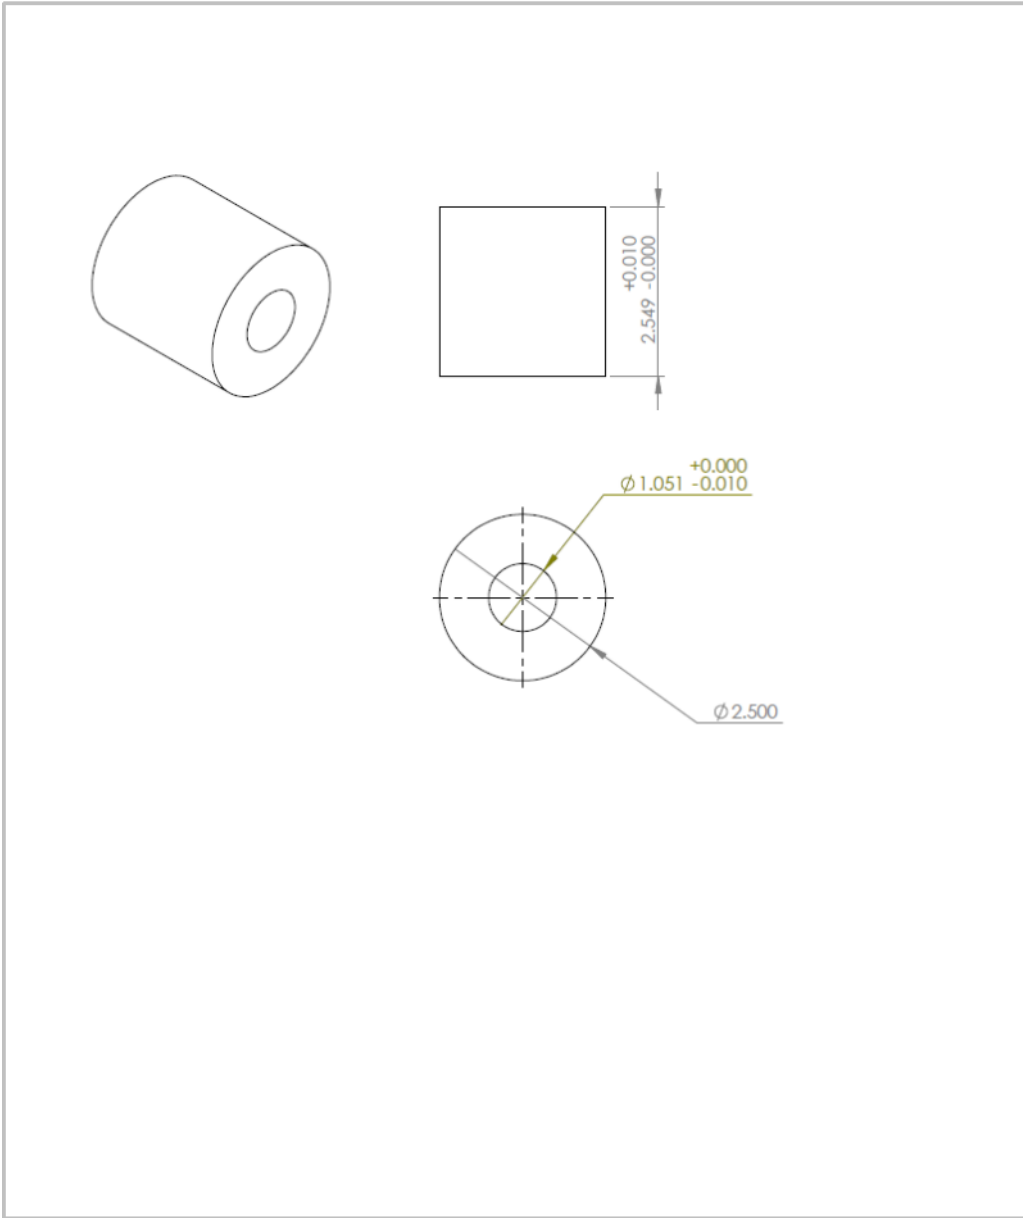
Pressure test chamber – PTFE CAD drawing.
